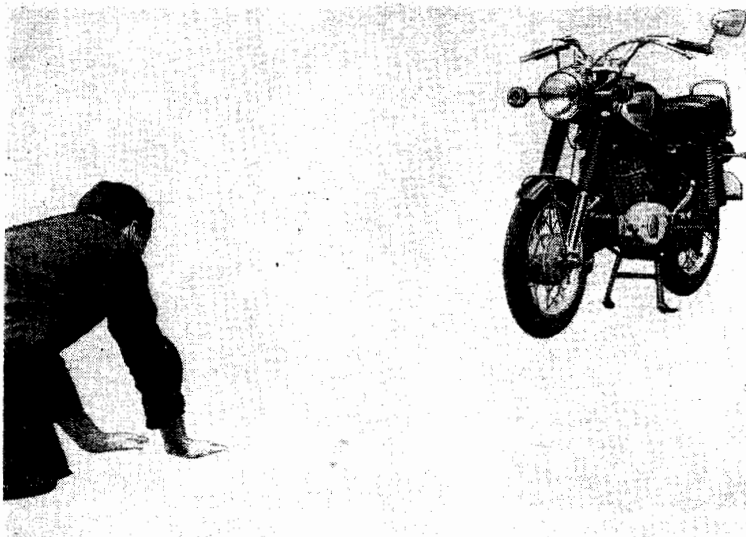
Aligning the rear wheel: the wheels must be sighted from the front
